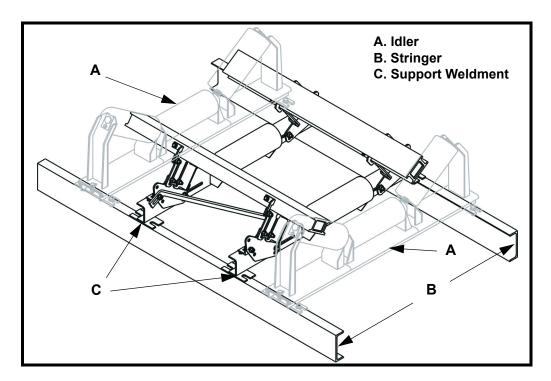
Locating Slider Cradle Between Idlers (Single-Bar Cradle shown)
